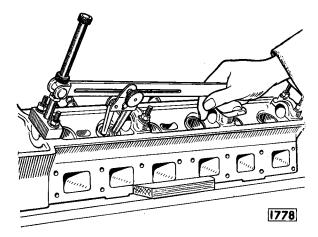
Fitting the valve springs utilising the valve spring compressing tool (Churchill Tool No. J.6118).
